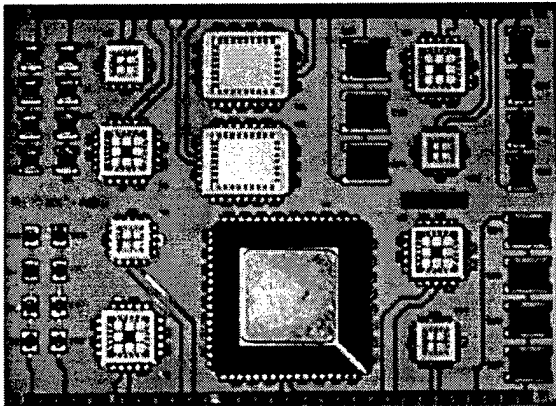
Hybrid test vehicle with components soldered in place with SnAg alloy.
